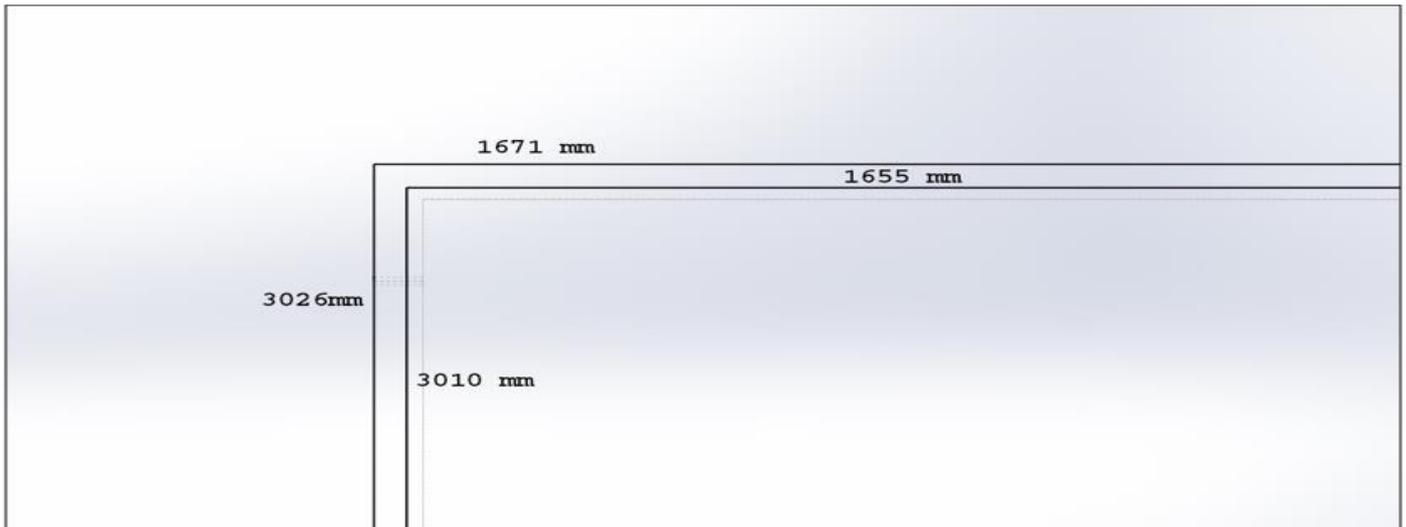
Image: Showcasing Dimensions of Inner and outer Frame of Hatchback Chassis
